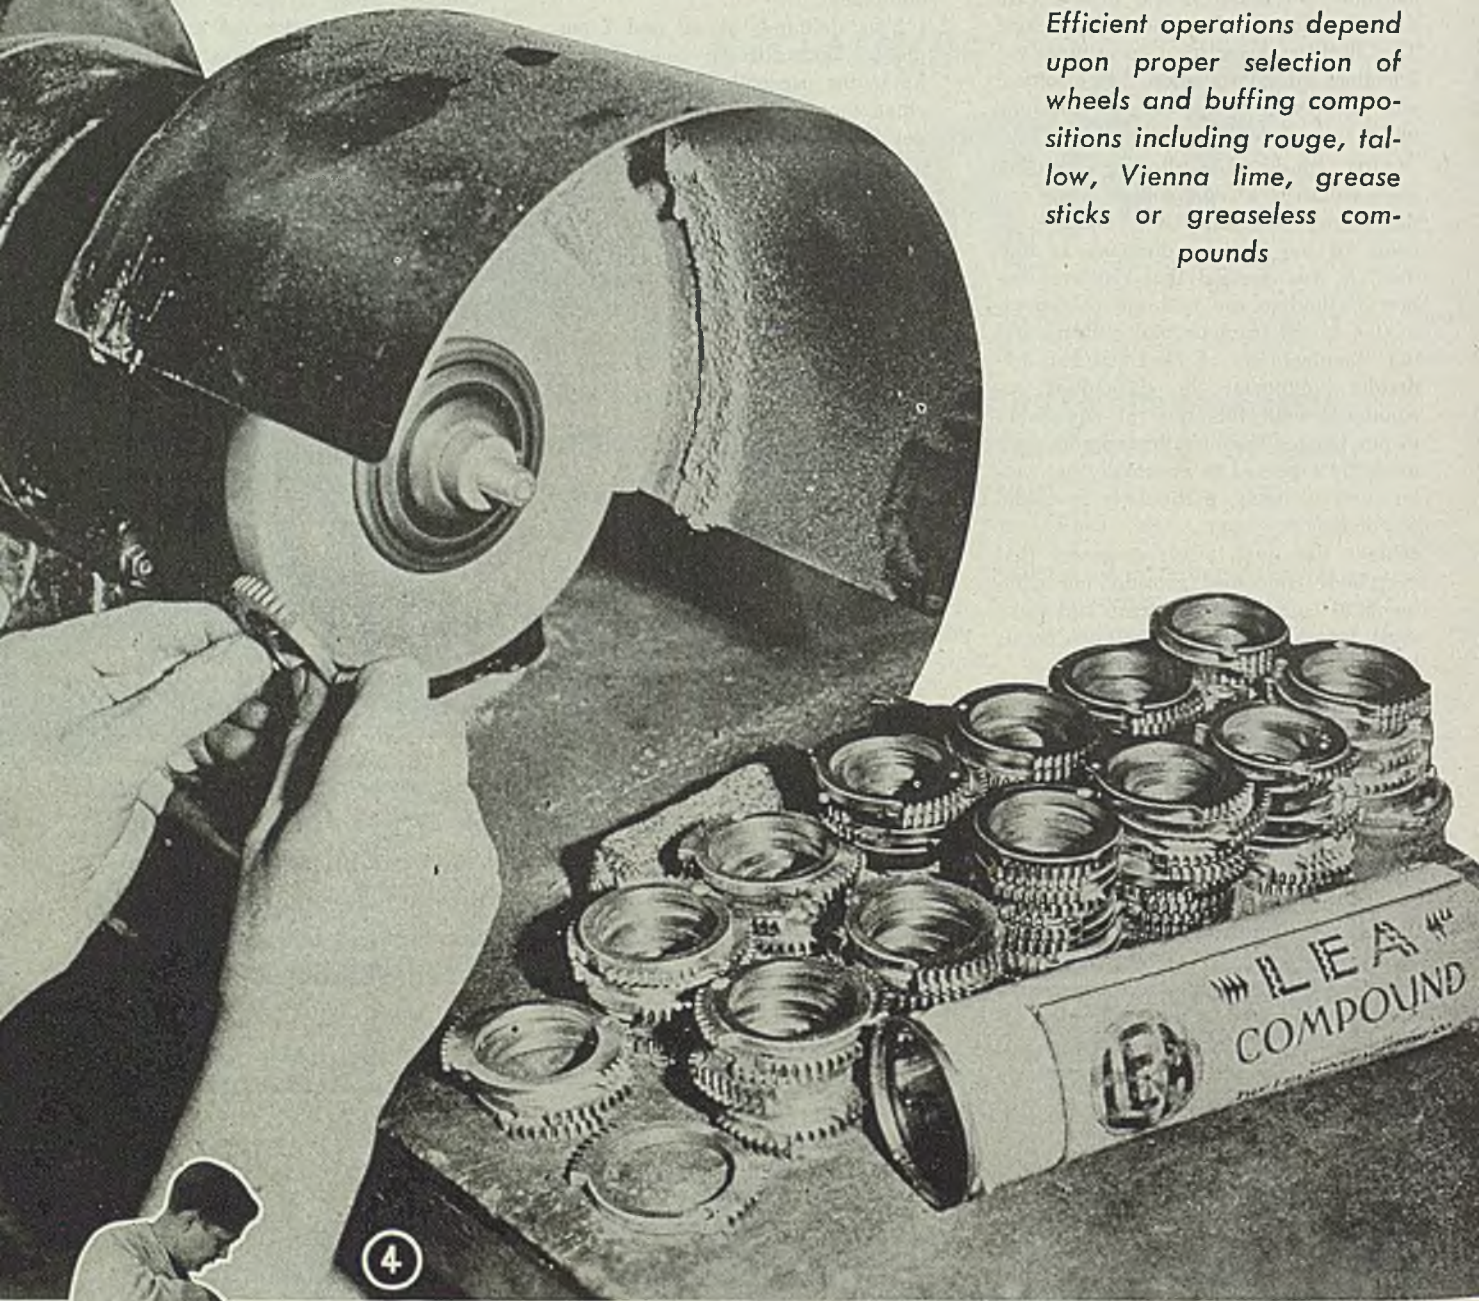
Burring gears and gear teeth using special abrasive compound on loose muslin buff. Photo courtesy Lea Mfg. Co.,
